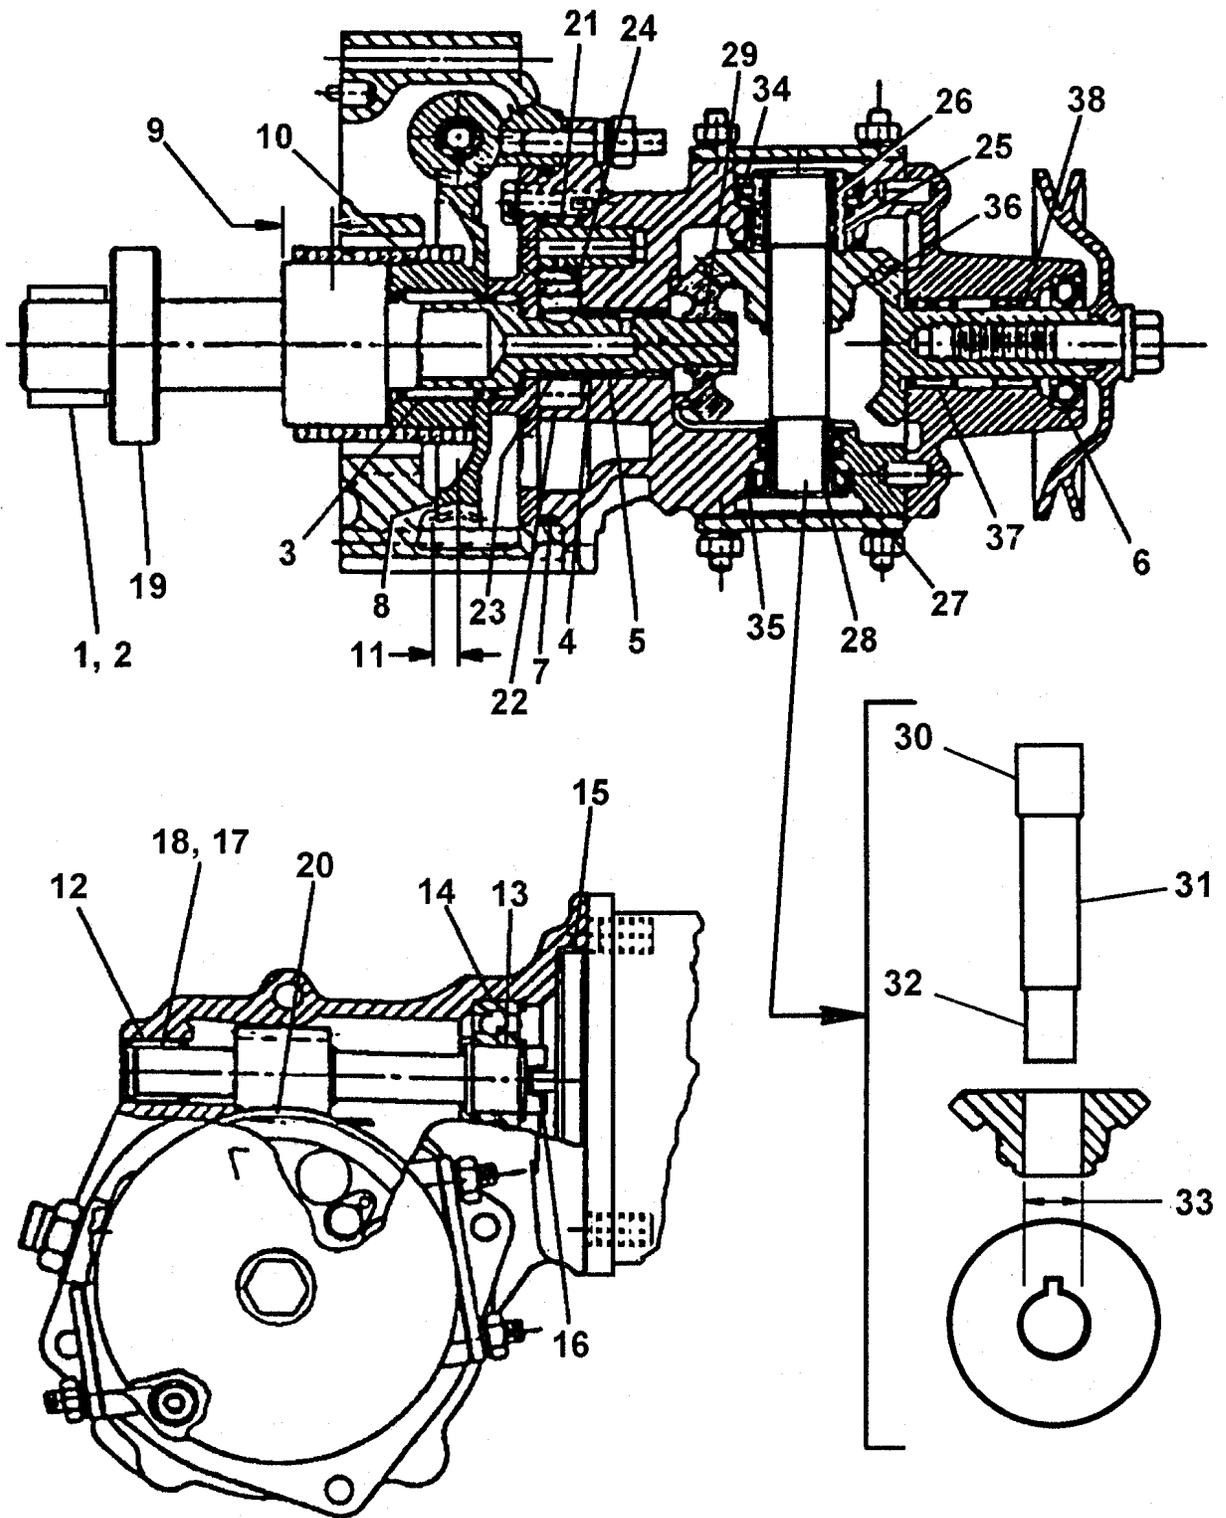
STARTER ADAPTER FITS & LIMITS
